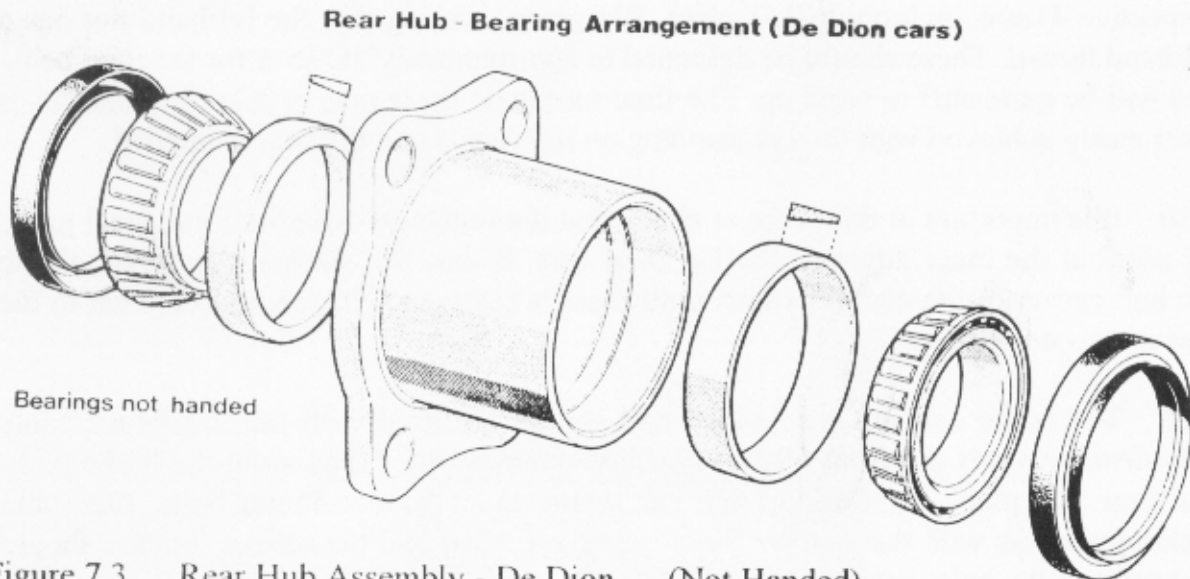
Rear Hub Assembly - De Dion (Not Handed)
